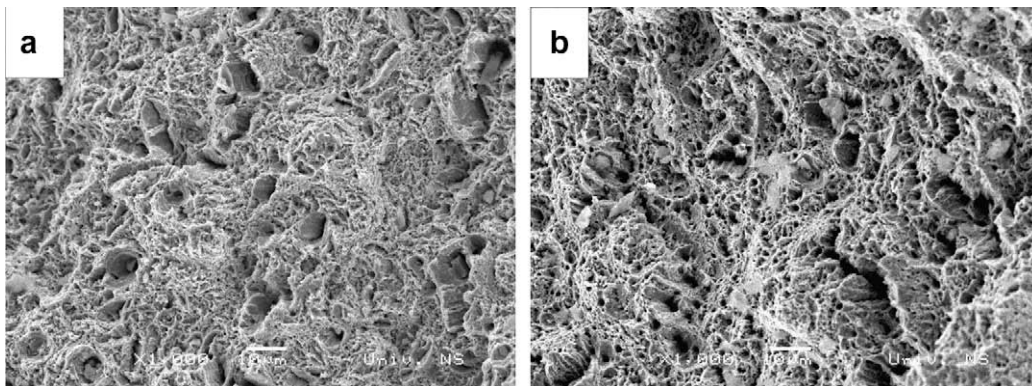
Fracture surfaces of tensile (a) and impact (b) tested samples of patented wire.
